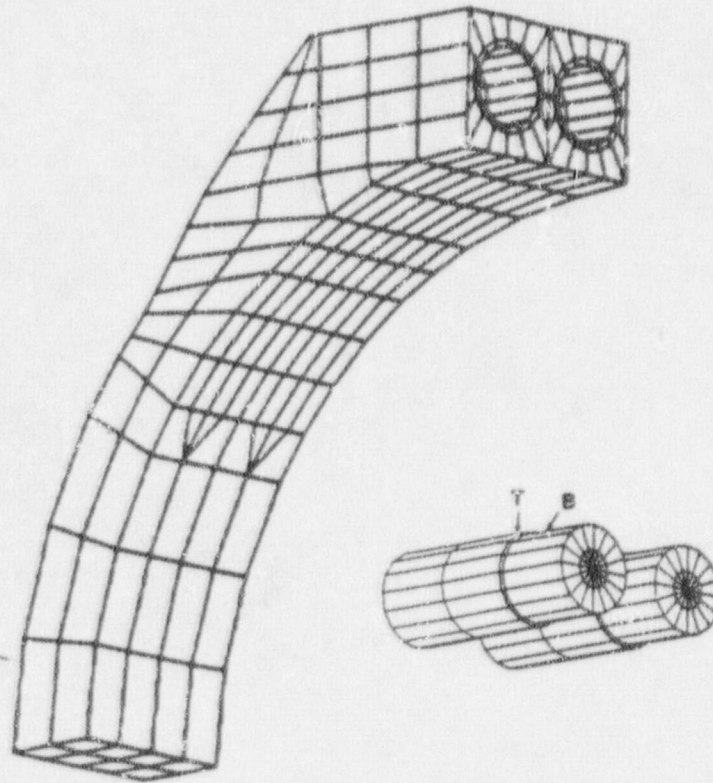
Three-dimensional finite element model of split closure ring T, threads; B, bolt.
